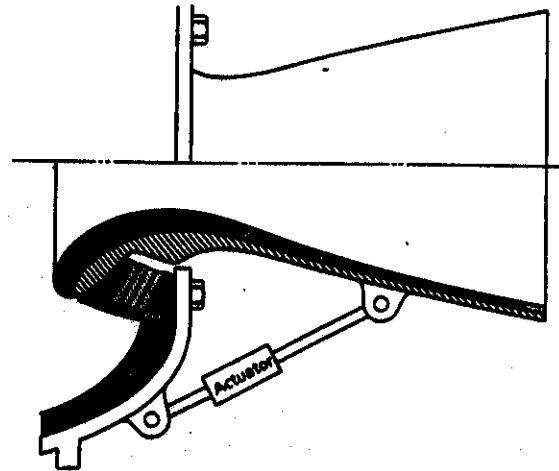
Movable nozzle using a flexible elastomeric laminated bearing.
